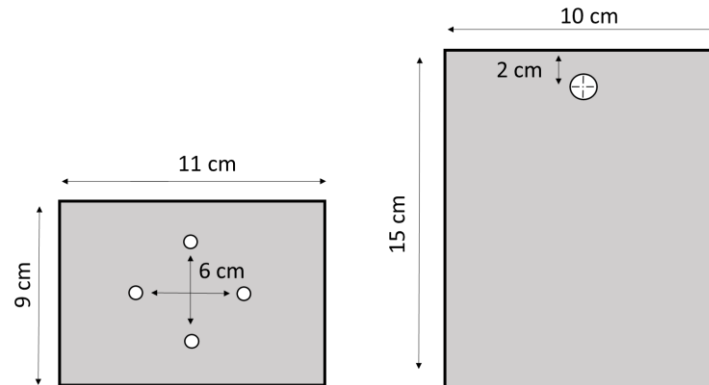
Locations of the holes used for handling of the plates in surface adhesion (left) and push-in/pull-out (right) tests.
